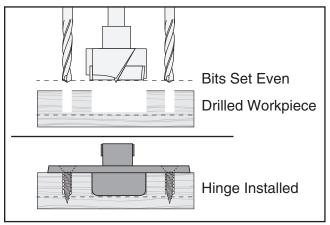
Hinge bits set even, holes drilled in workpiece, hinge installed.
